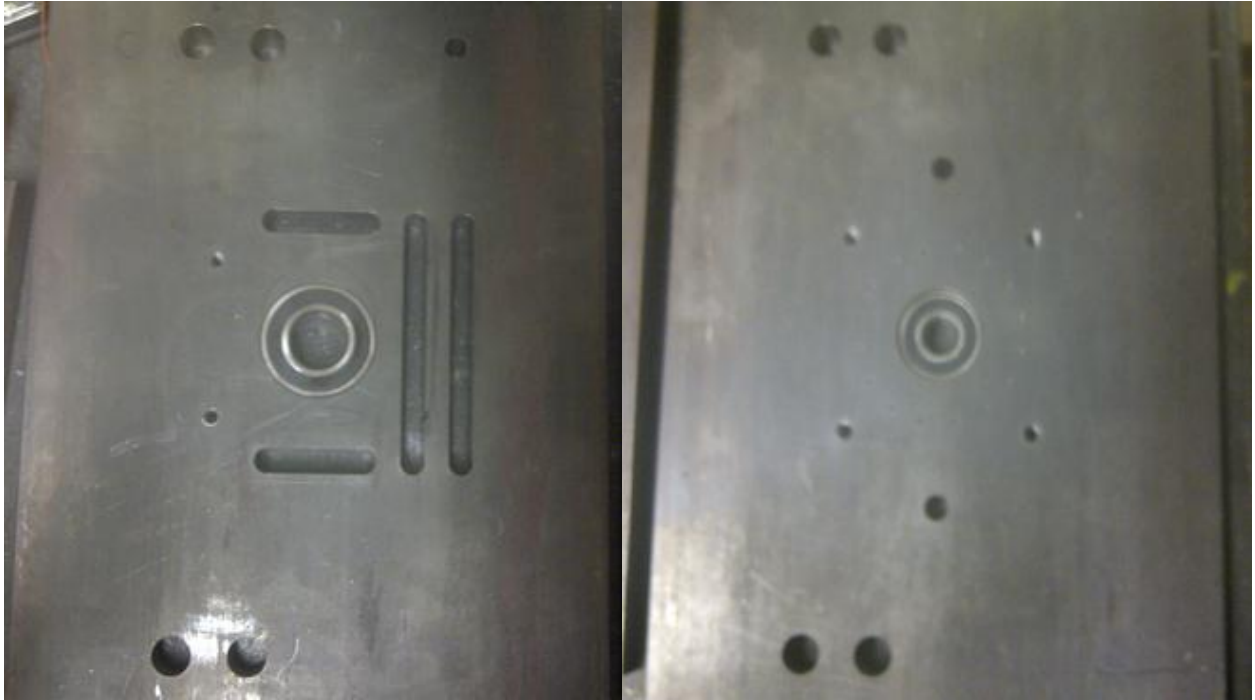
Picture of the completed end plates. Left: Brake shaft end plate, Right: Commutator side end plate.
